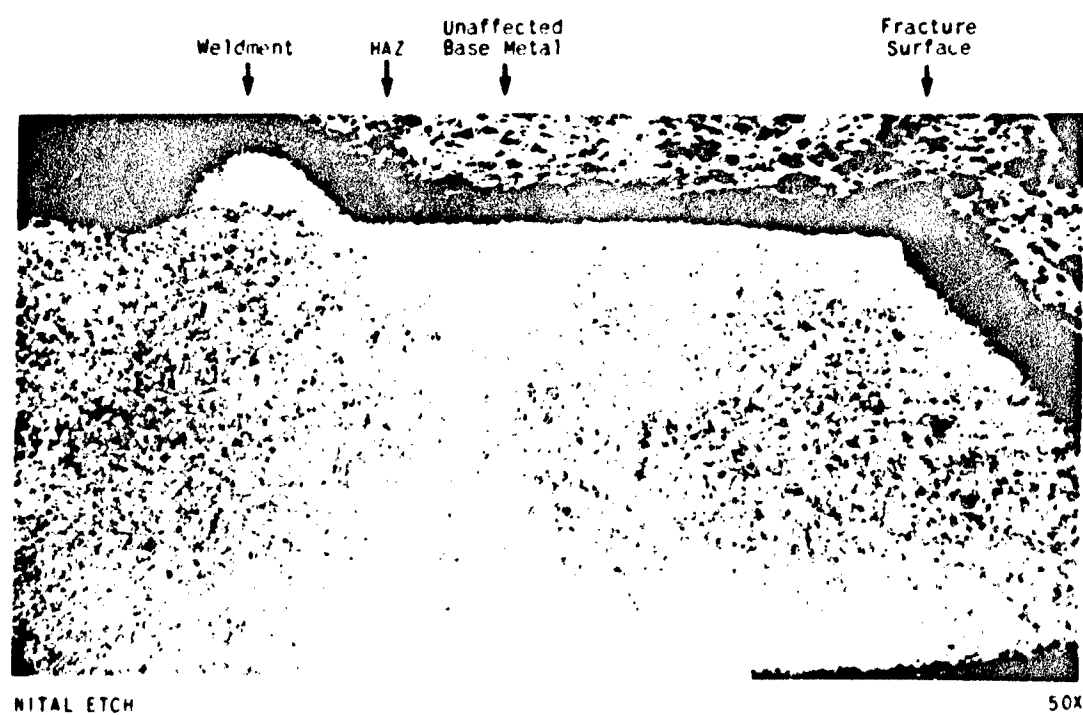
ELECTRON-BEAM WELD IN CASE 106
